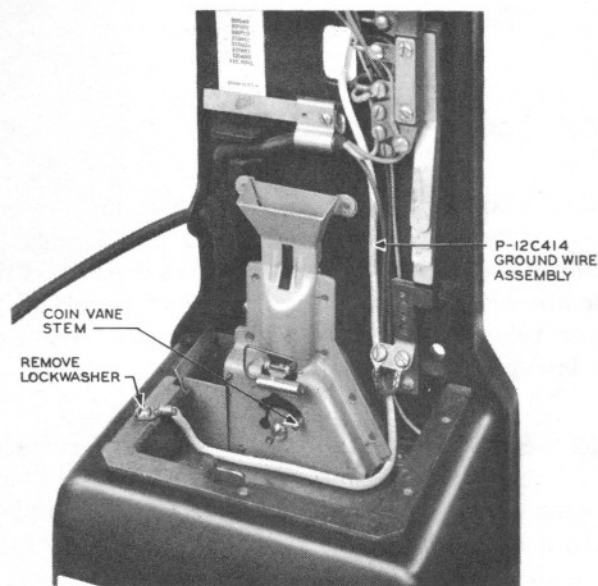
Method of Grounding Backplate Assembly, Indoor Booth
